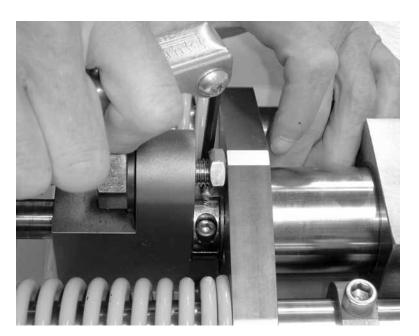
With the split ring lock pressed in place, tighten the screws securely.
